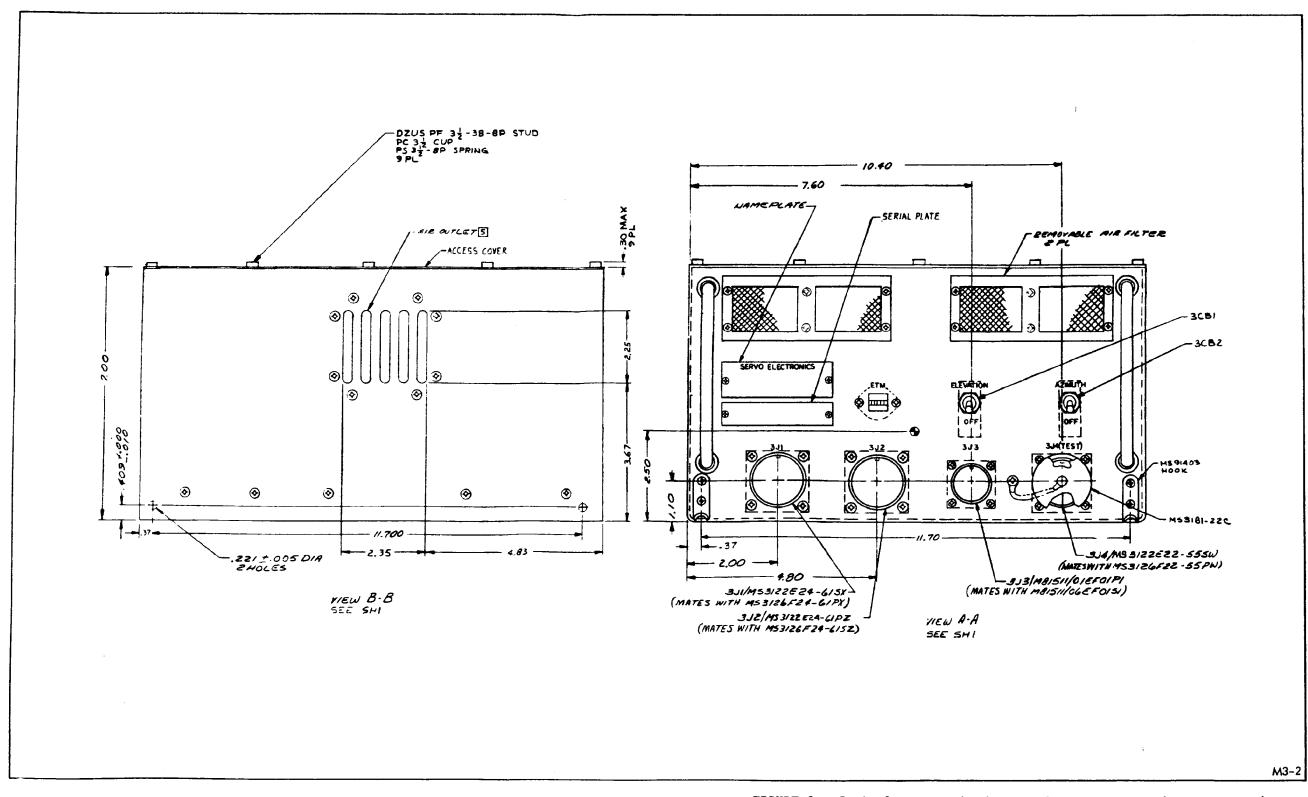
Control servomechanism, outline drawing. (sheet 2 of 2)
